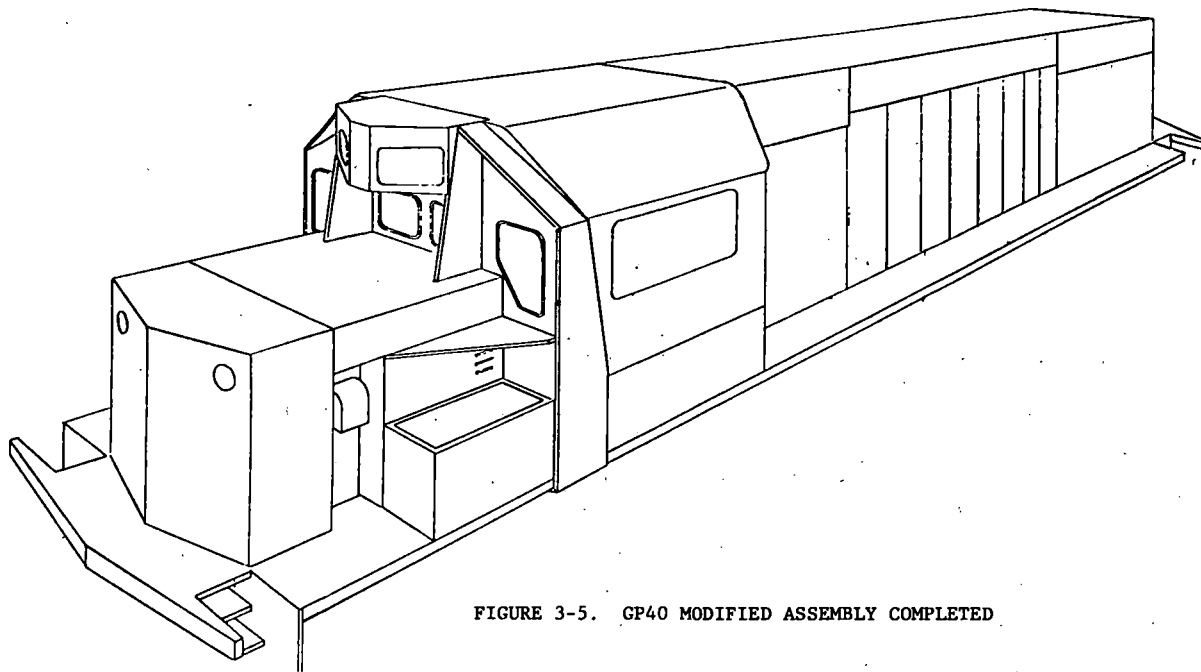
GP40 MODIFIED ASSEMBLY COMPLETED
